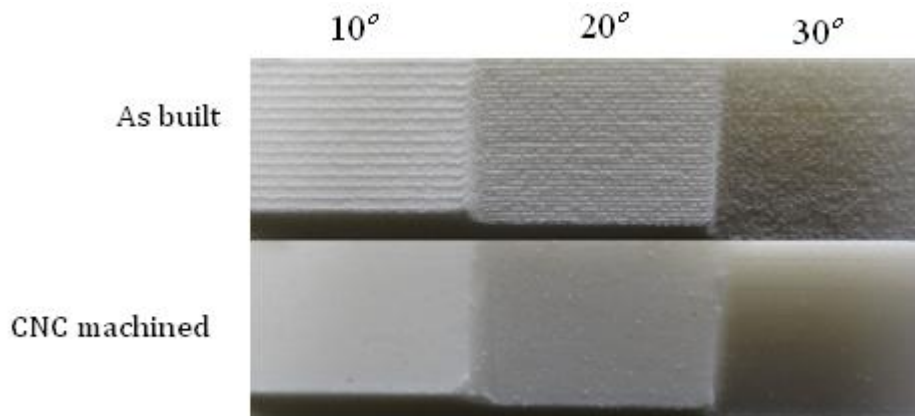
Improvement of surface finish of nylon test piece through CNC machining
